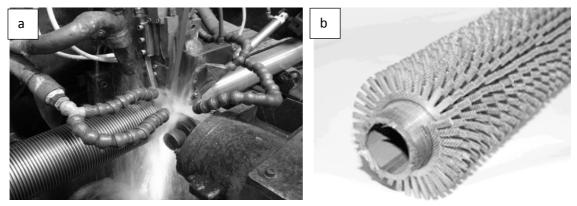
The welding process currents of high frequency (HF) of finned tubes (a) [12], the pipe is made with the rib serrated HF technology. (b) [13]
